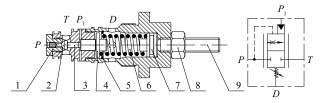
Sketch and schematic diagram of anti-jamming valve. 1-seat; 2-spool; 3- mandrel; 4- spring seat; 5- retaining ring; 6-spring; 7- adjusting plug; 8- lock screw; 9- adjusting screw.
